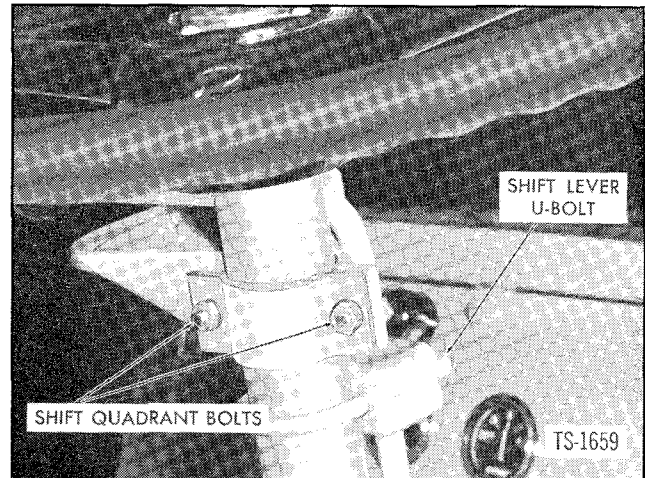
Tighten Shift Quadrant and Shift Lever Mounting Bolts
